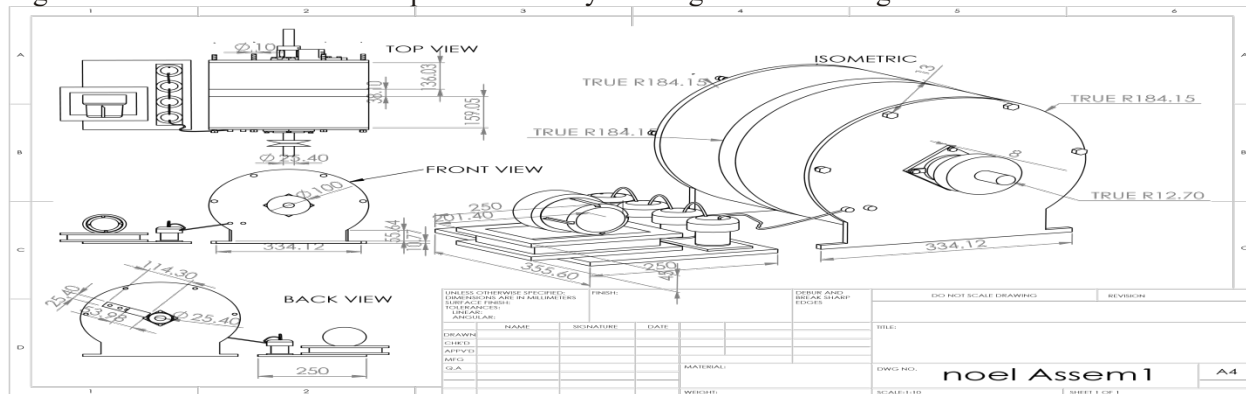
Assembly Drawing of a Fuel-less Generator
